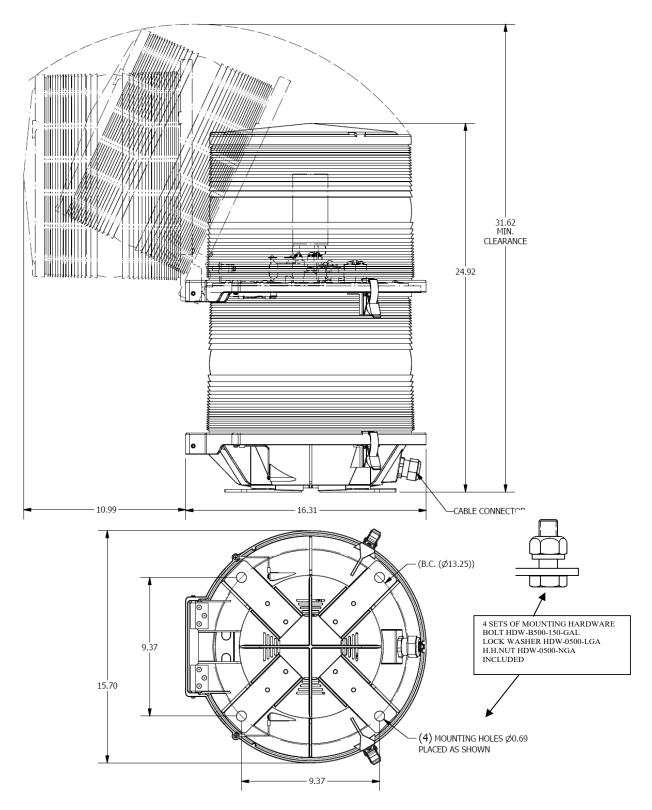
IFH-3400 Dual Flash Head Dimensions and Mounting Detail - 1
